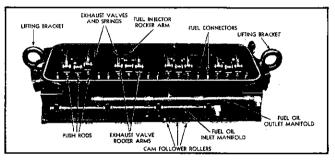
Cylinder Head Assembly Ready to be Installed.
